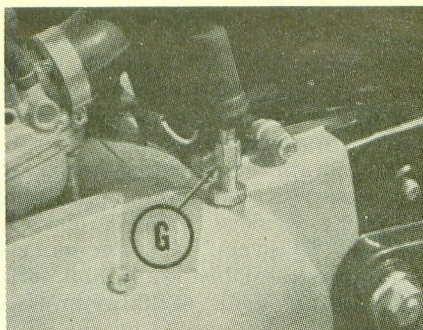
Clutch hand lever (cable) free play is adjusted by turning cable guide (G).
